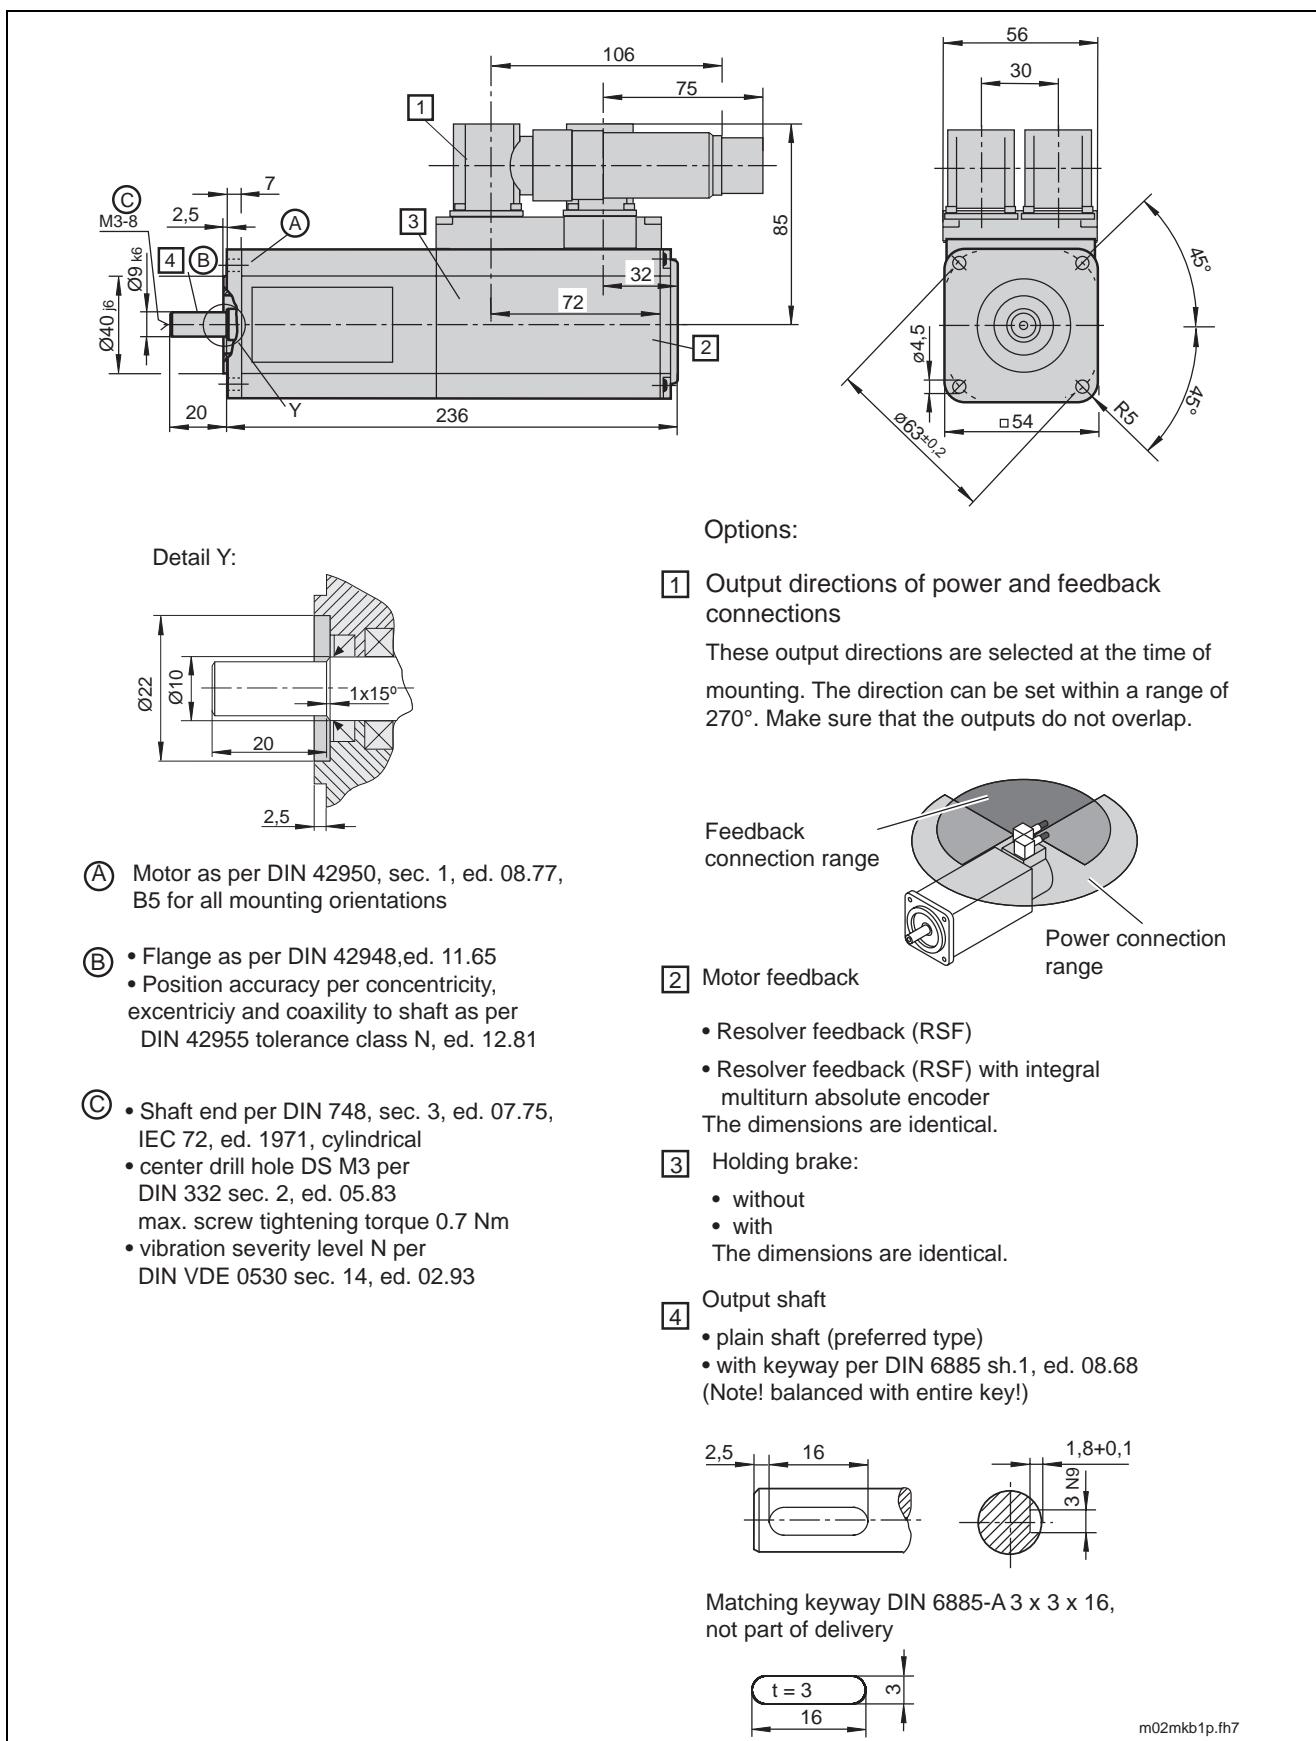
Dimensions sheet MKD025B (plug-in connection)
